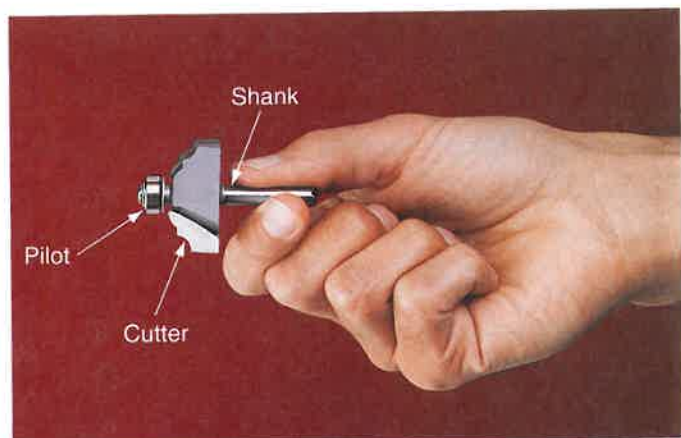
This ball bearing pilot is screwed onto the end of the shank. (Bosch)
